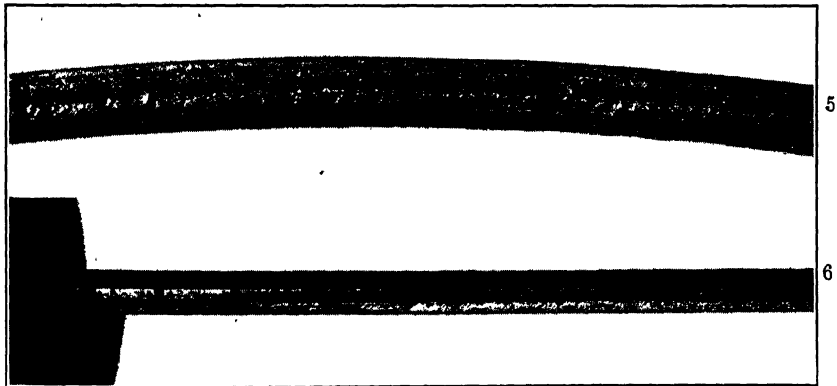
BEGINNING OF CHECK MARKS IN TORN SURFACE OF COPPER WIRE CAUSED BY ENTERING DIE ECCENTRICALLY.
